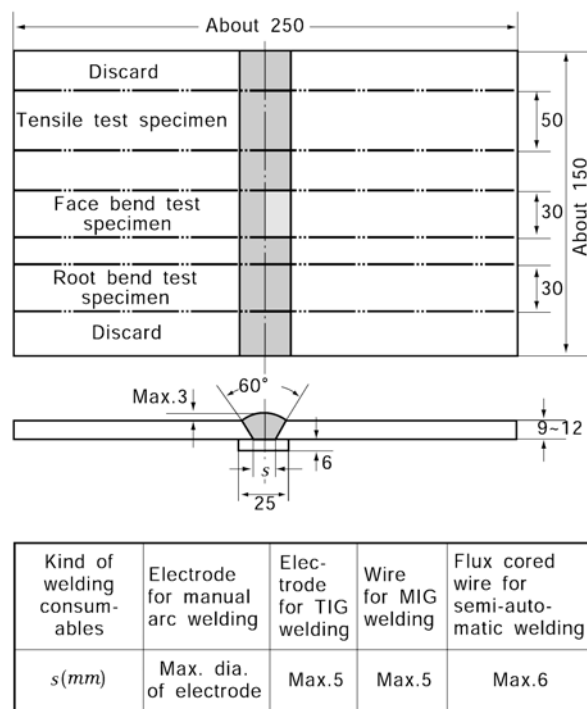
Butt Weld Test Assembly for Stainless Steel
